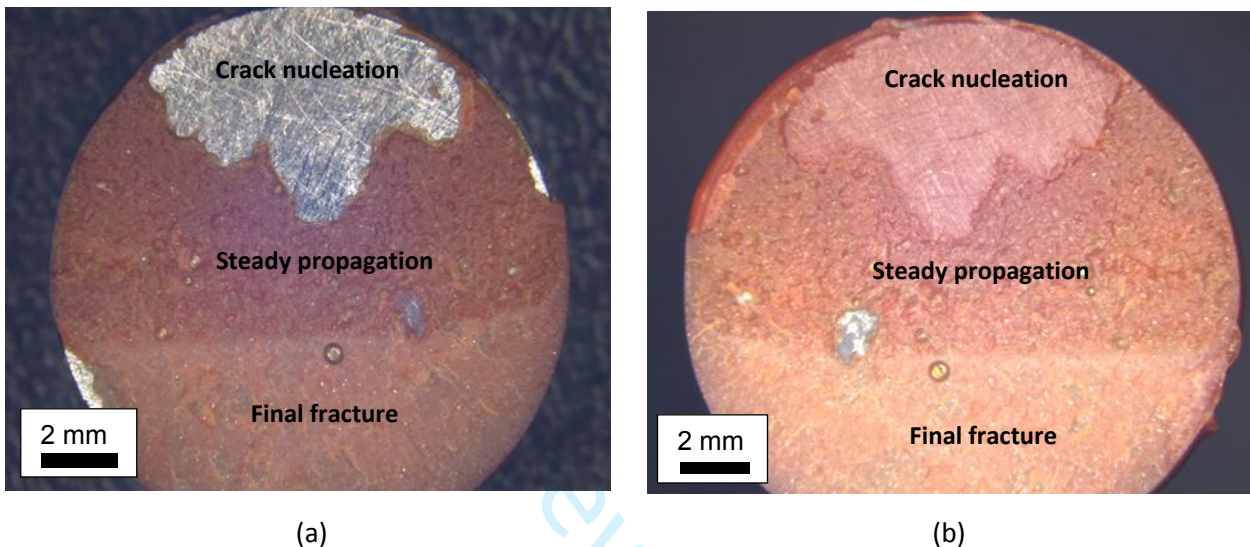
Typical fracture surface for specimens without artificial defects: a) adherend 1; b) adherend 2.
